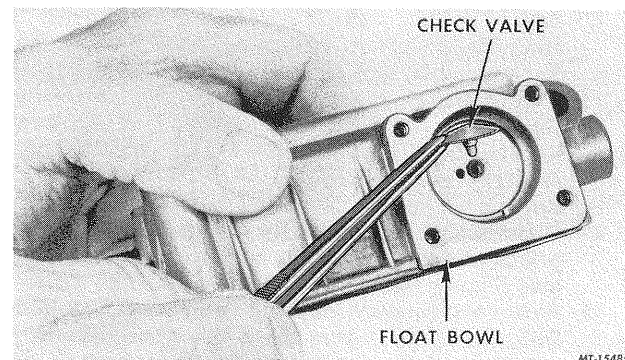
Removal or Installation of the Plastic Pump Intake Check Valve
